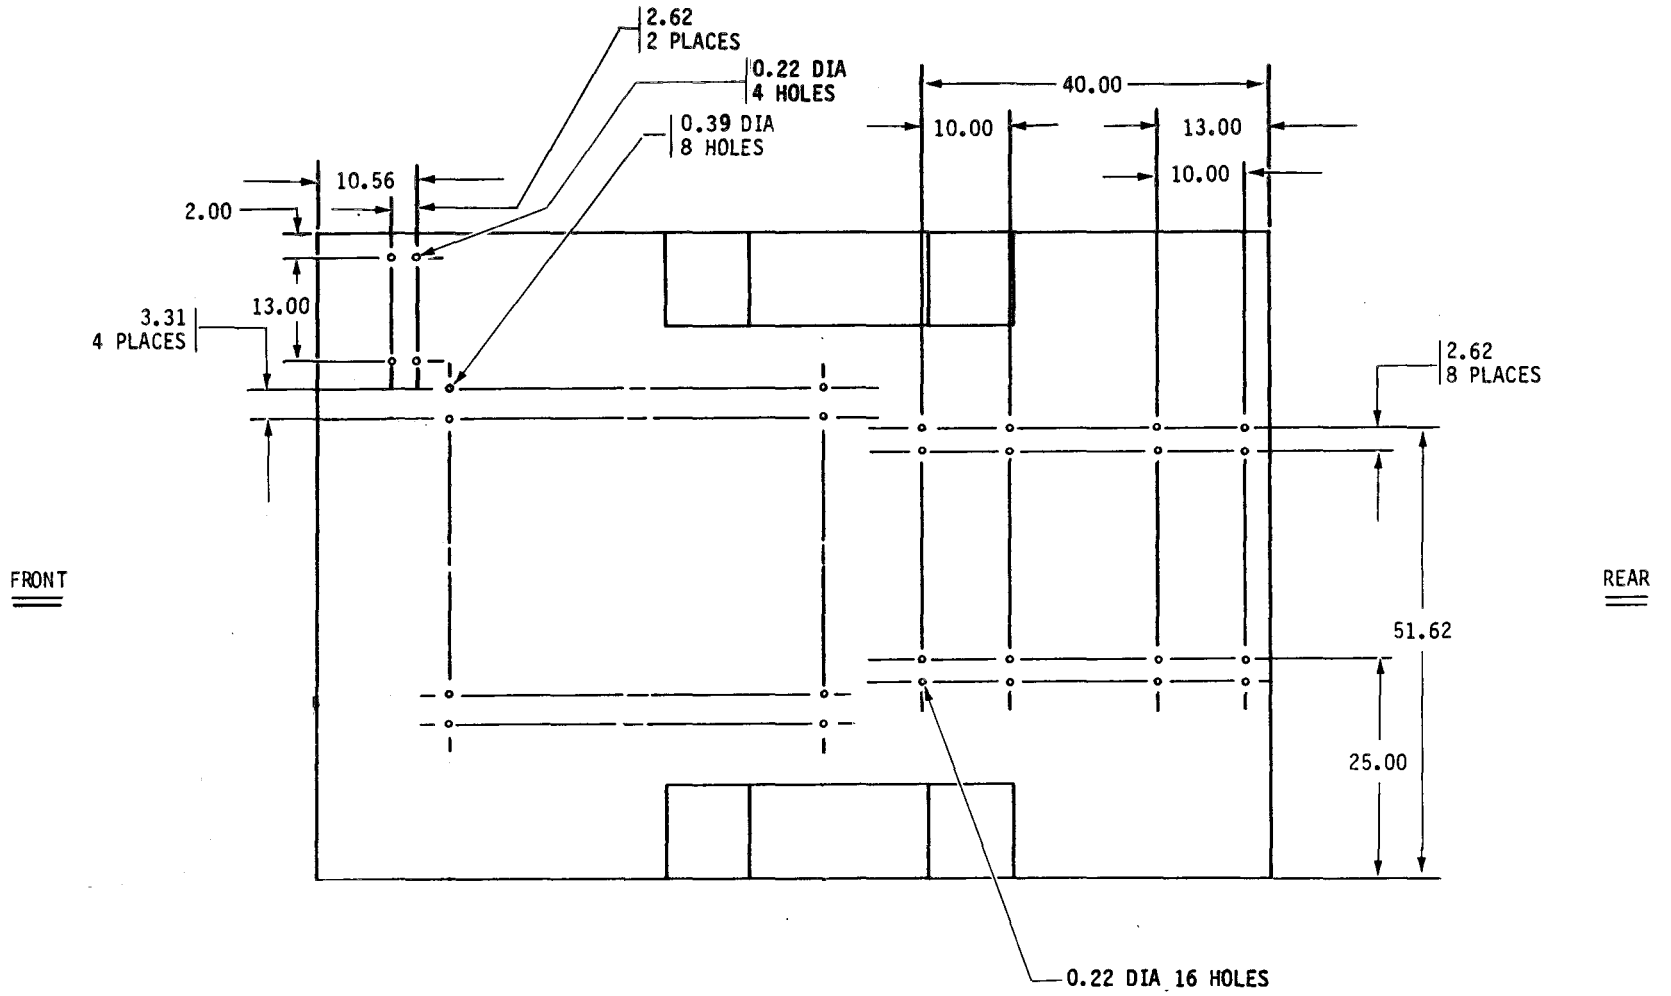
Hole dimensions for floor mounted equipment, floor plan, unit 4, M105A2.
